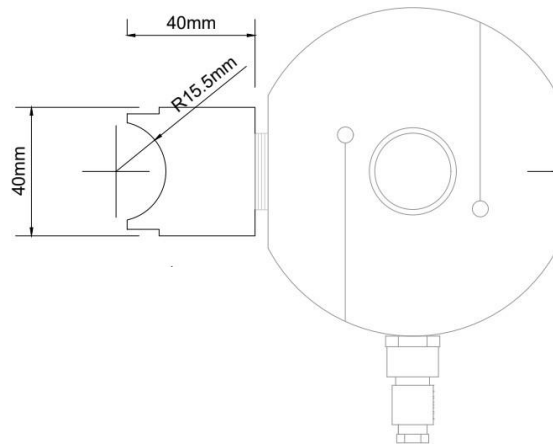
An elevation of how the manufactured connection will connect with the load cell
